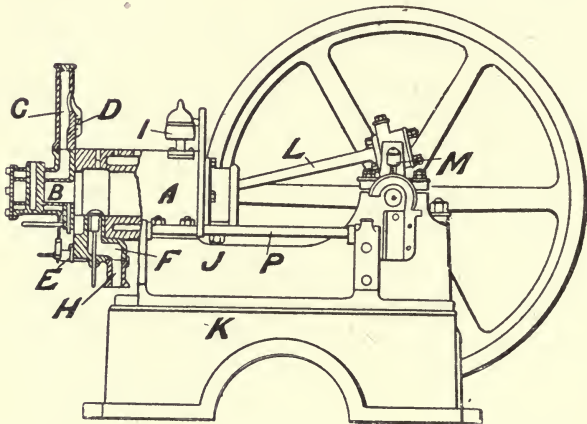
Weyman & Hitchcock's Oil Engine (part section).
